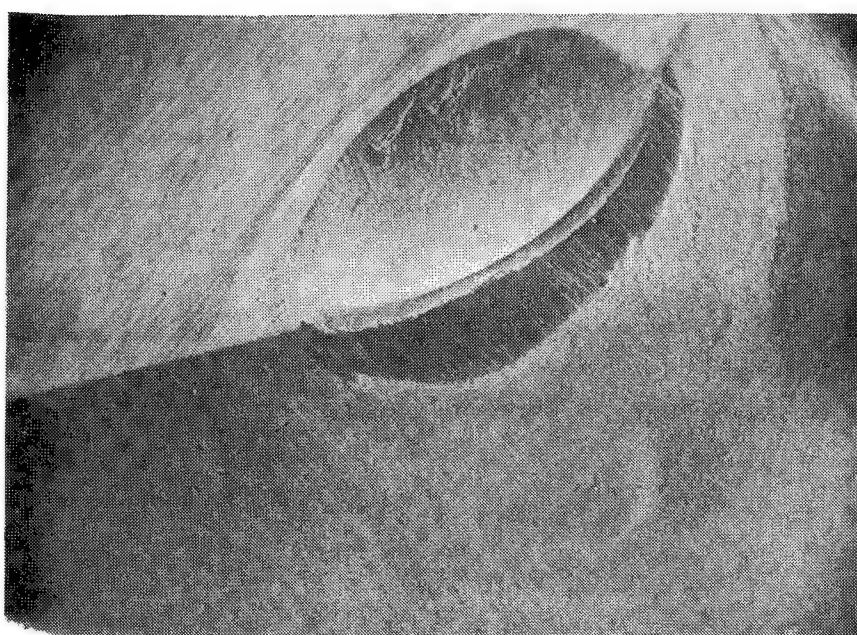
Photograph of a Typical Turning Test Tool for Fluid #3.
